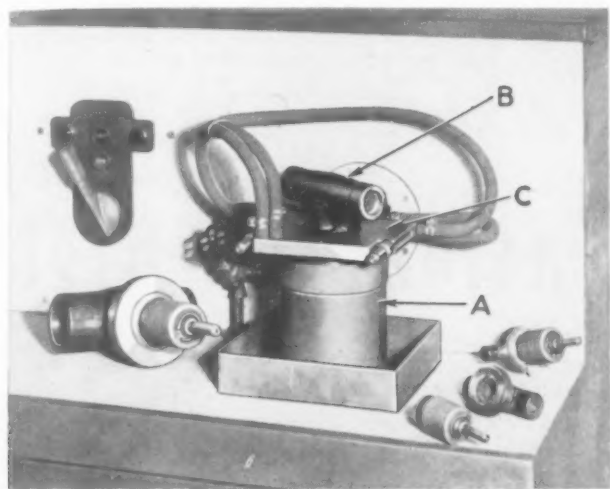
A fixture used for brazing a valve body-bellows assembly, including a water tank for controlling heat dissipation.
